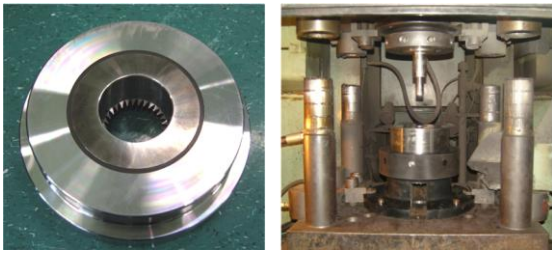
The manufactured die set for the forward extrusion process of helical gears
